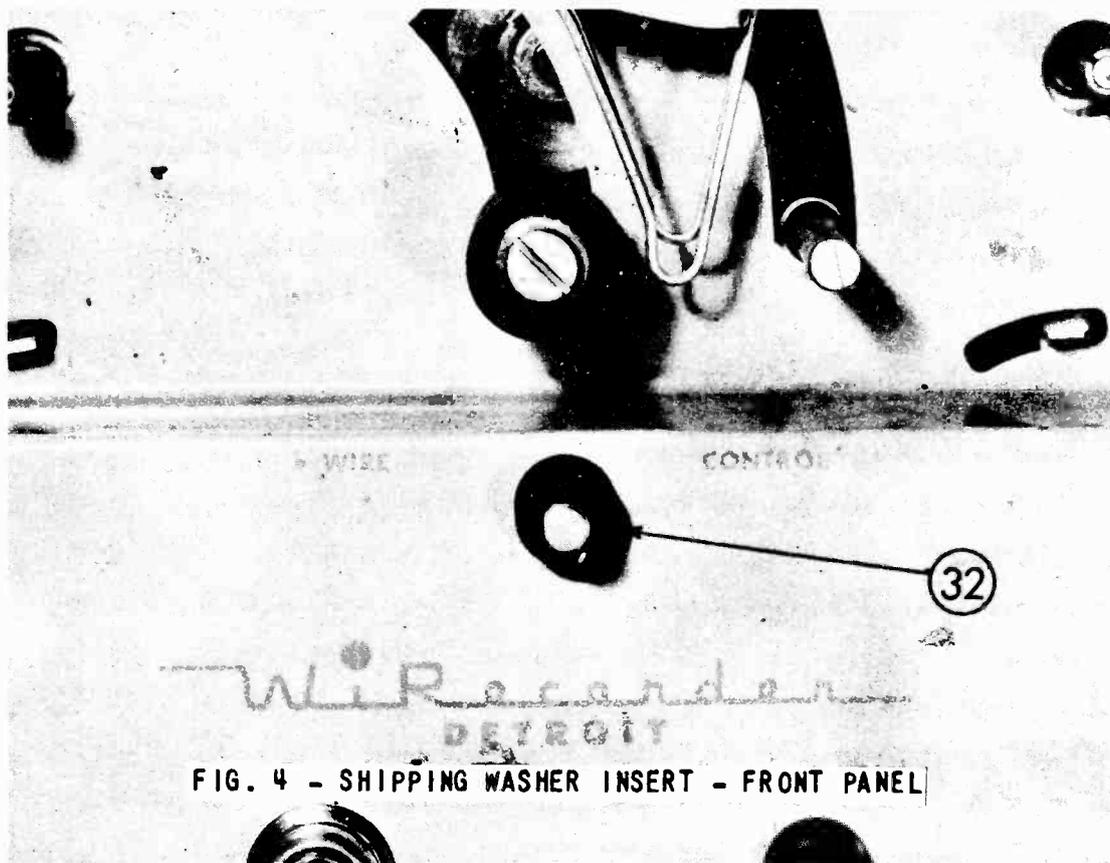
SHIPPING WASHER INSERT - FRONT PANEL
